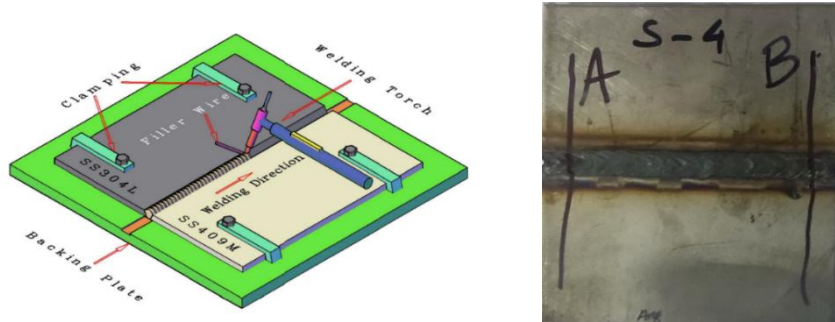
Schematic diagram of welding process and welded sample
